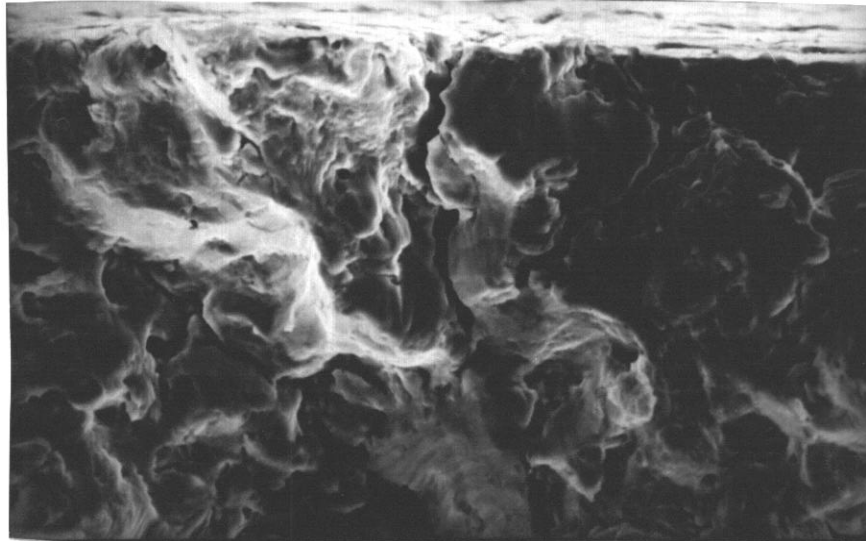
Fracture surface near to specimen surface. Notice the region where the fracture crack is believed to have been initiated.
